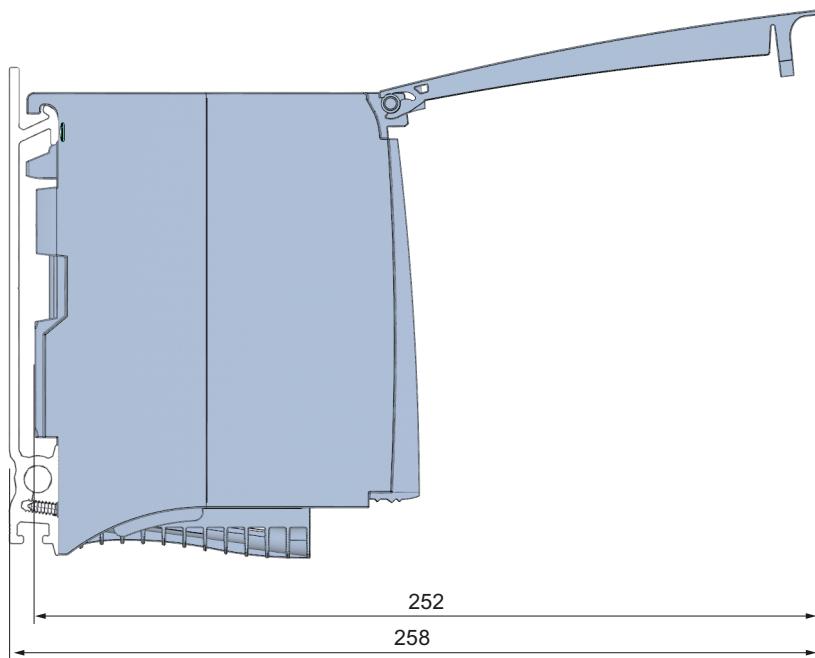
Dimensional drawing of the PS 60W 120/230V AC/DC module, side view with open front panel
